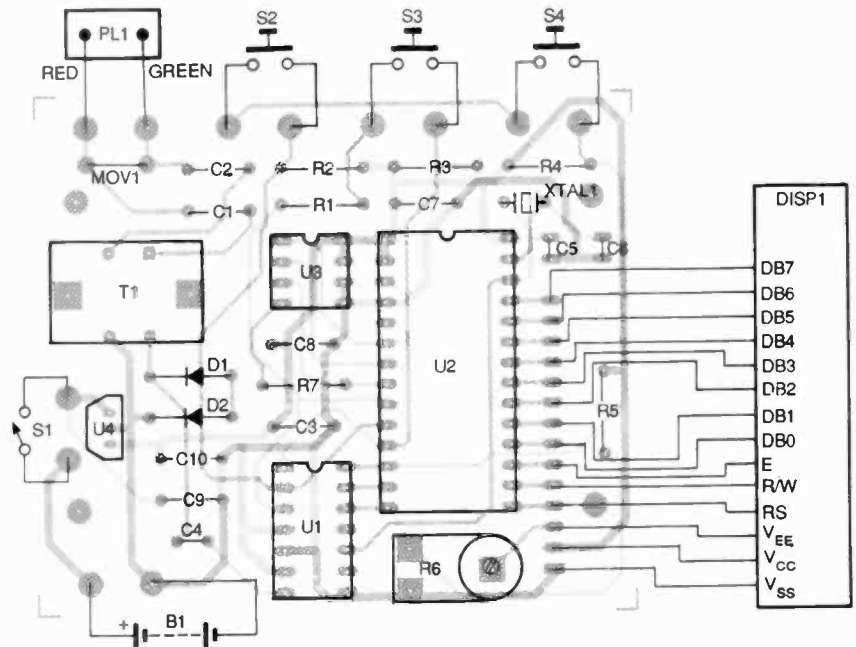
Use this parts-placement diagram when mounting components to the component side of the PC board. Ribbon cable can be used to connect the display module to the main board.
